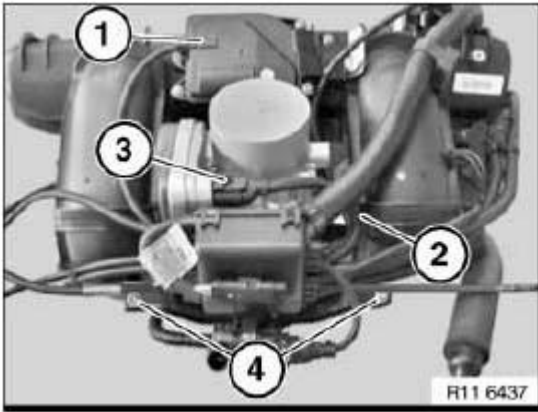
Identifying Plug Connection And Engine Wiring Harness
